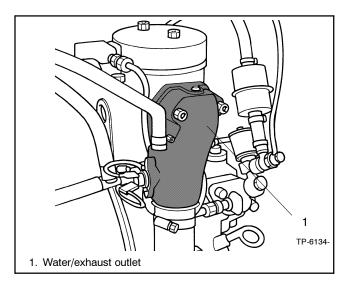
Mixer Elbow/Exhaust Connection, 4EOZ/3.5EFOZ Model Only
